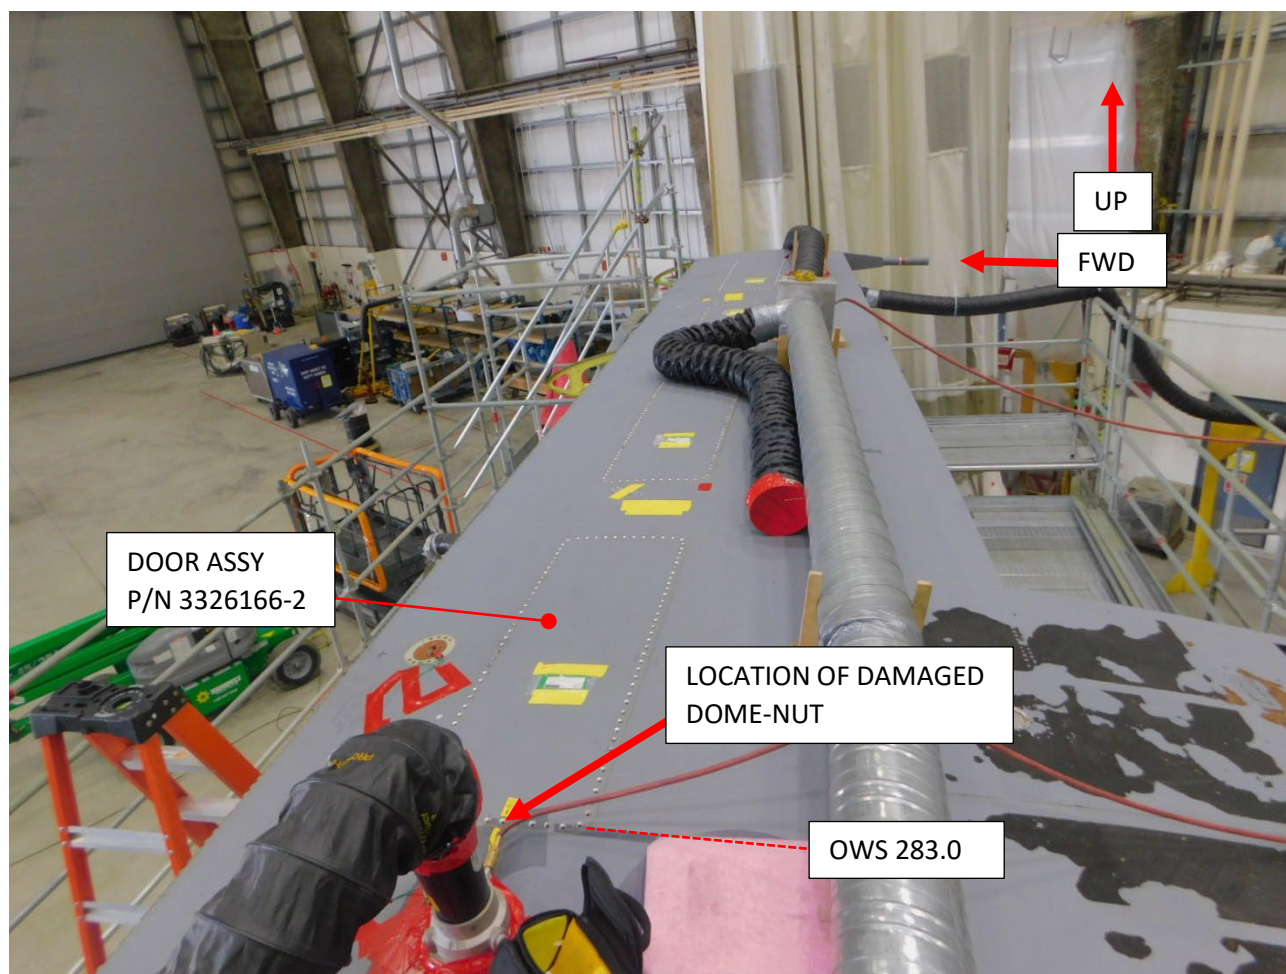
View looking OUTBD at location of damaged dome-nut on RH Outer Wing Upper Surface
